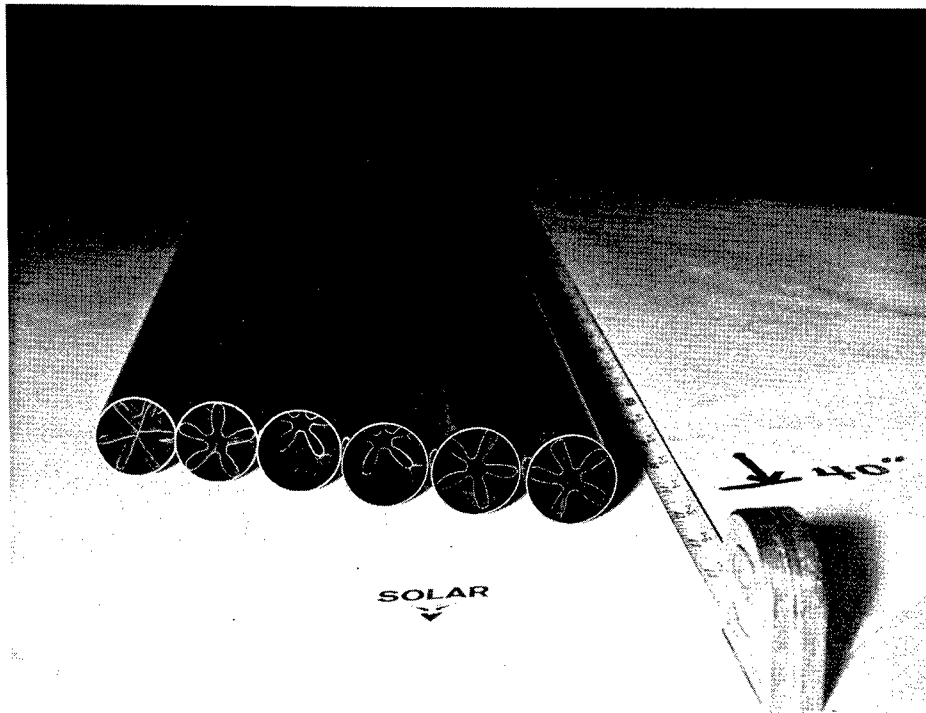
END VIEWS OF FOUR 18-INCH AND TWO 36-INCH HEAT RECEIVER TUBES; Post-Brazing
